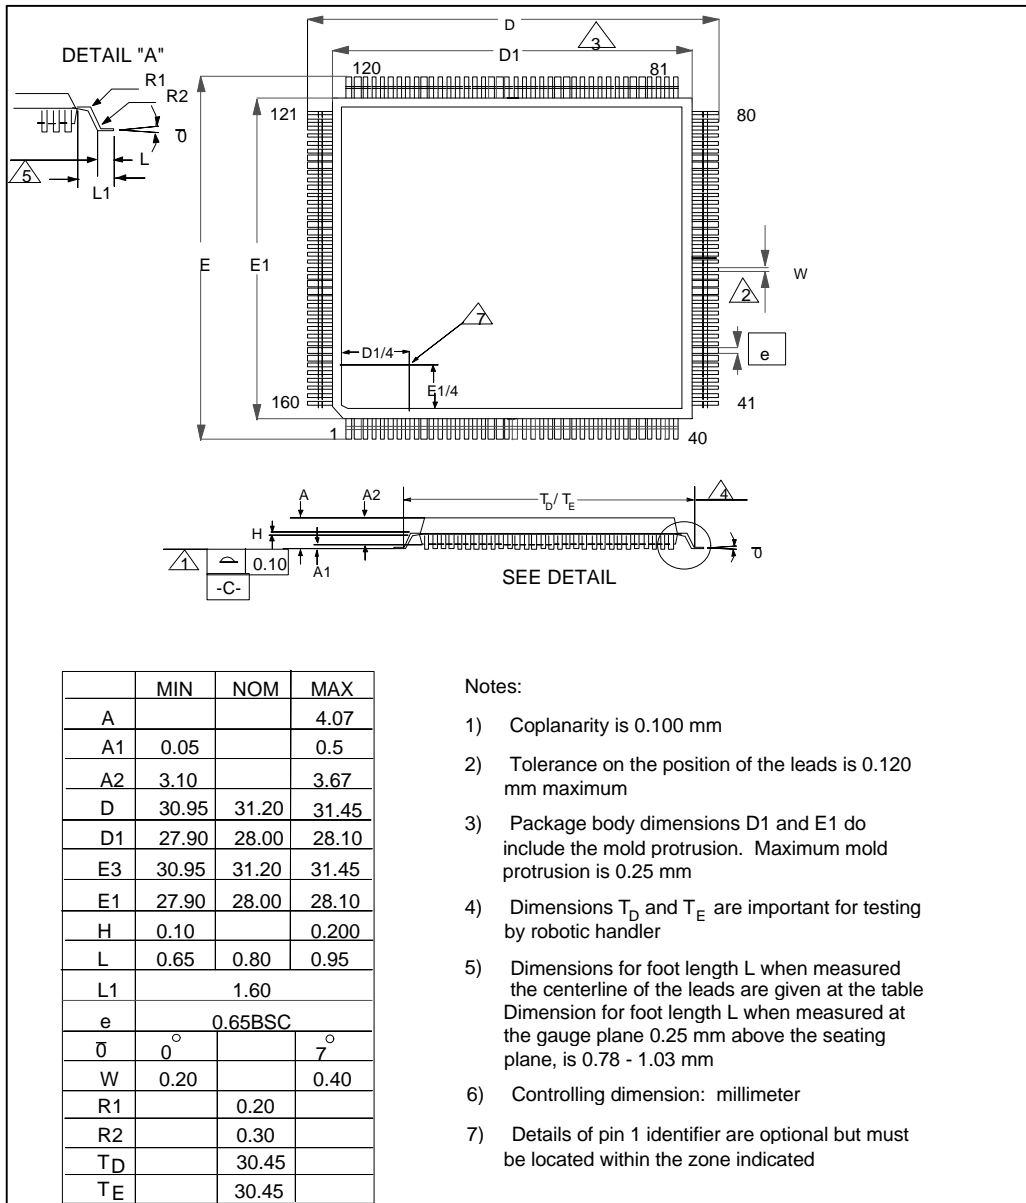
160 PIN QFP PACKAGE OUTLINE
